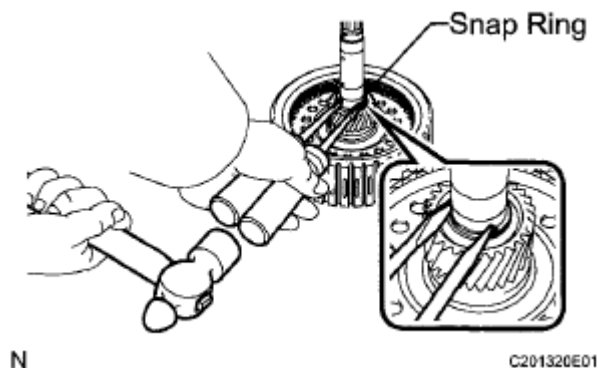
Removing Rear Planetary Sun Gear Thrust Needle Roller Bearing
